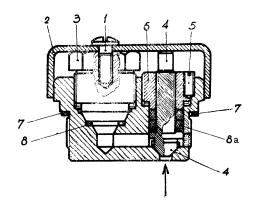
COMPENSATOR PISTON -ASSEMBLY
